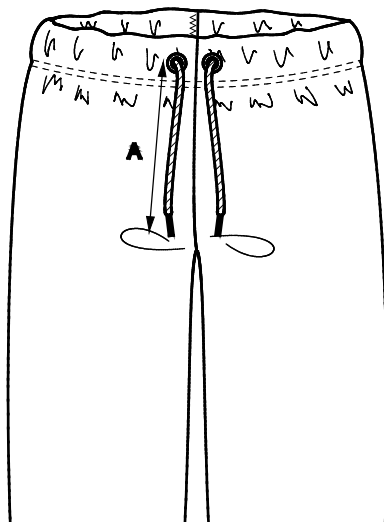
Measurement of drawstrings when garment is open to its largest and laid flat
